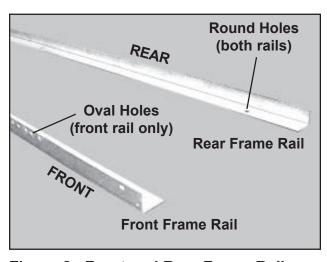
Front and Rear Frame Rails Laid Out for Assembly.
